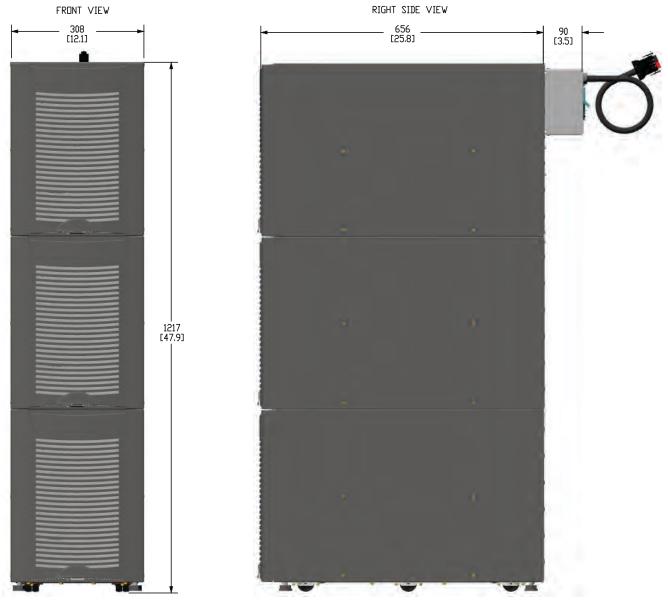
Extended Battery Module Dimensions (3-High Front and Right Side Views)
